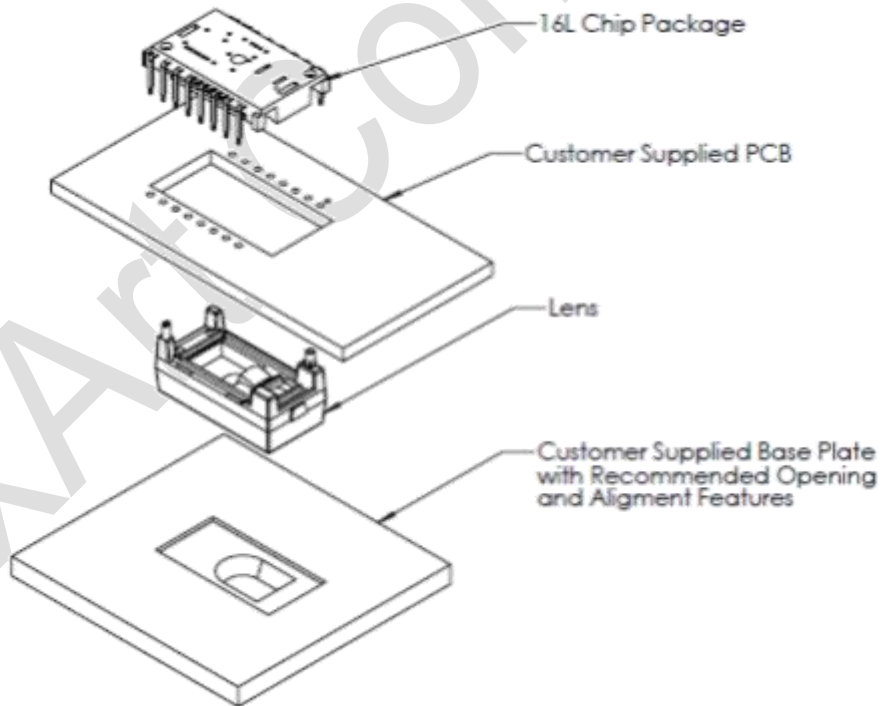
Exploded View of System Assembly with LOAE-LSI1 Lens
